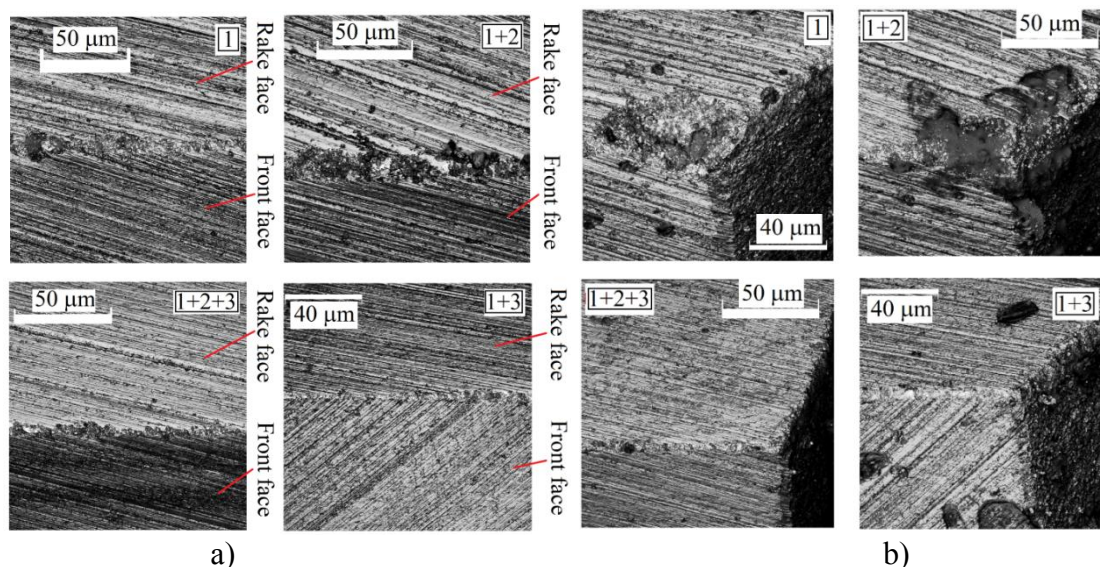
Cutting edge of changeable carbide inserts in the center (a), net to the tip (b) after grinding with diamond wheels: 1 – AC4 100/80, 2 –AC6 80/63, 3 –ACH 40/28
